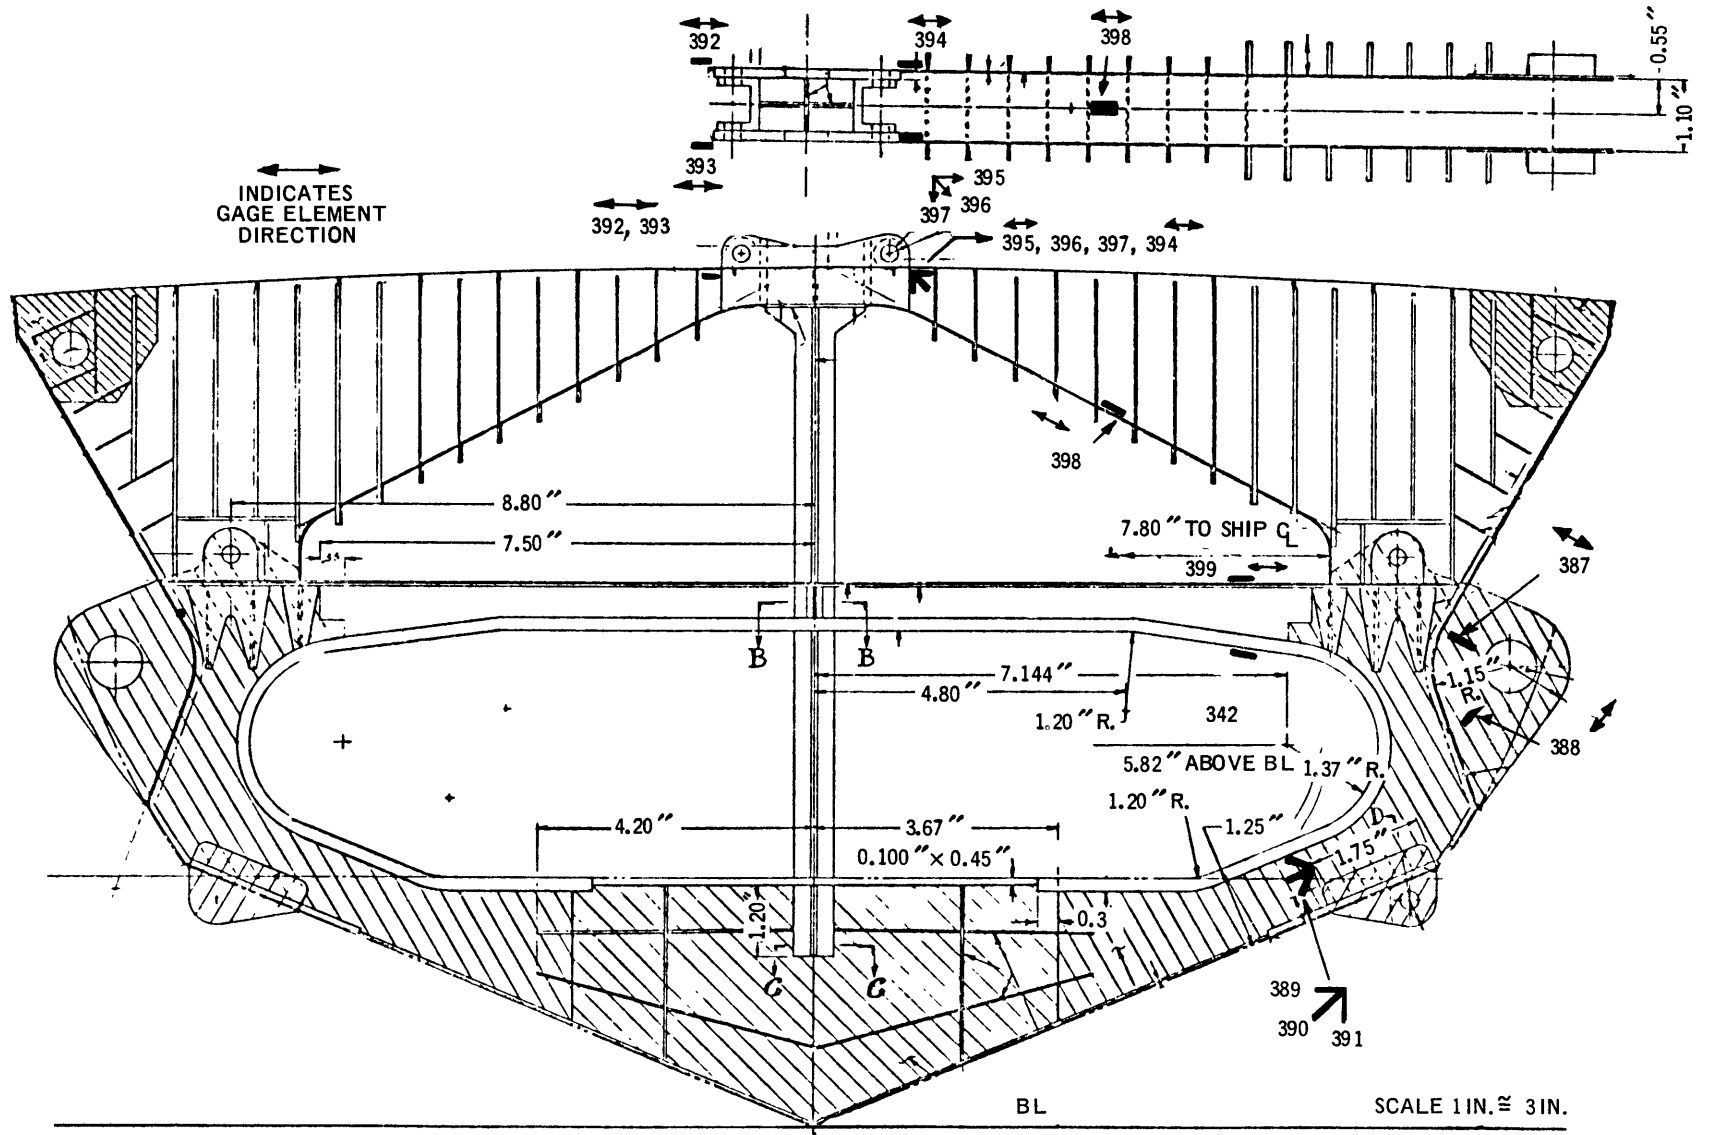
Frame 27 2.19 In. Aft of Frame 26
